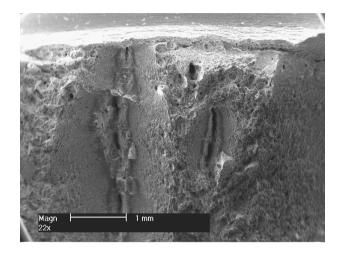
Fracture surface of base material of 2507 steel
